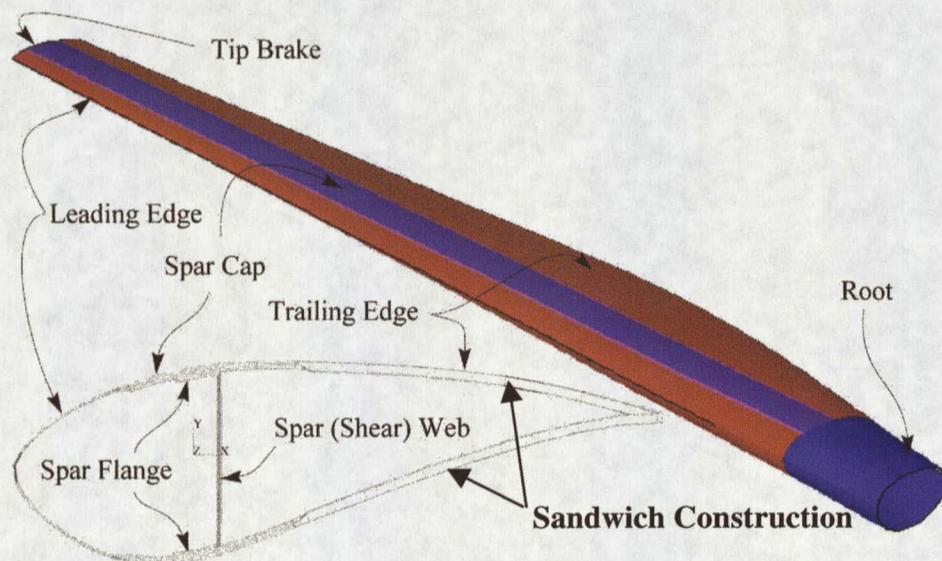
CAD drawing of the MSU fiberglass AOC15/50 wind turbine blade design with a cross section.
